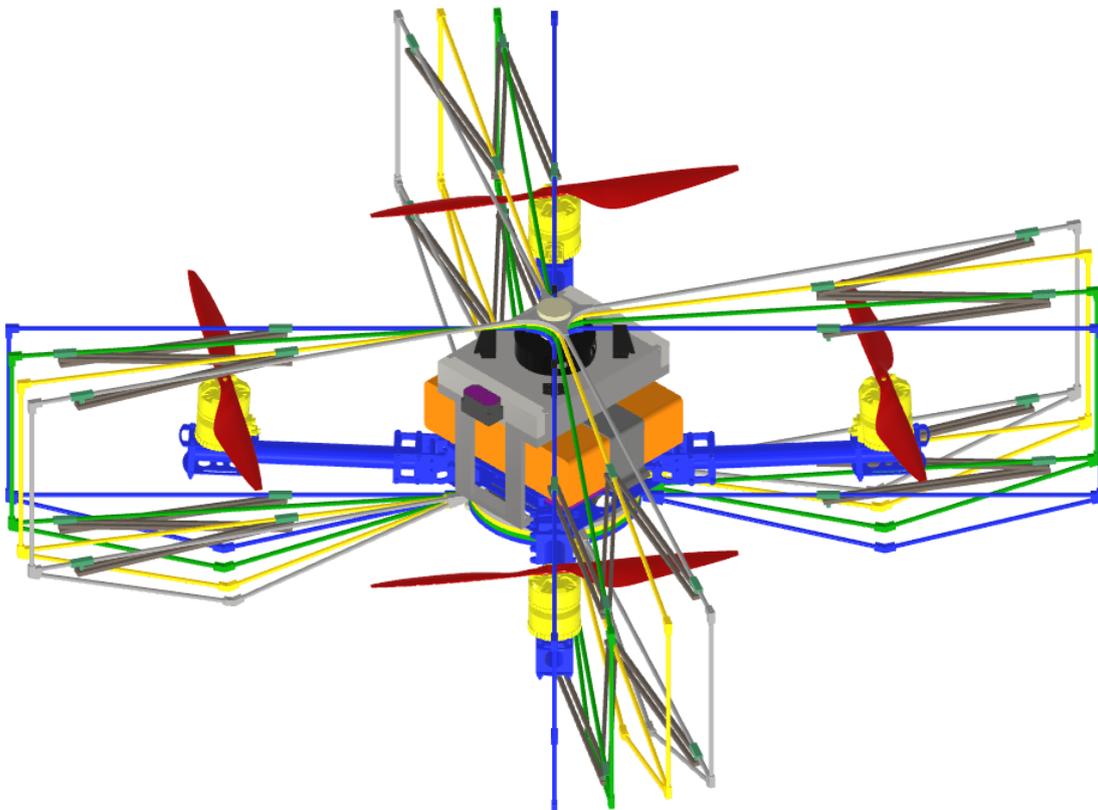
View of proposed solution with frame, sensors, box with electrical components installed on the drone
